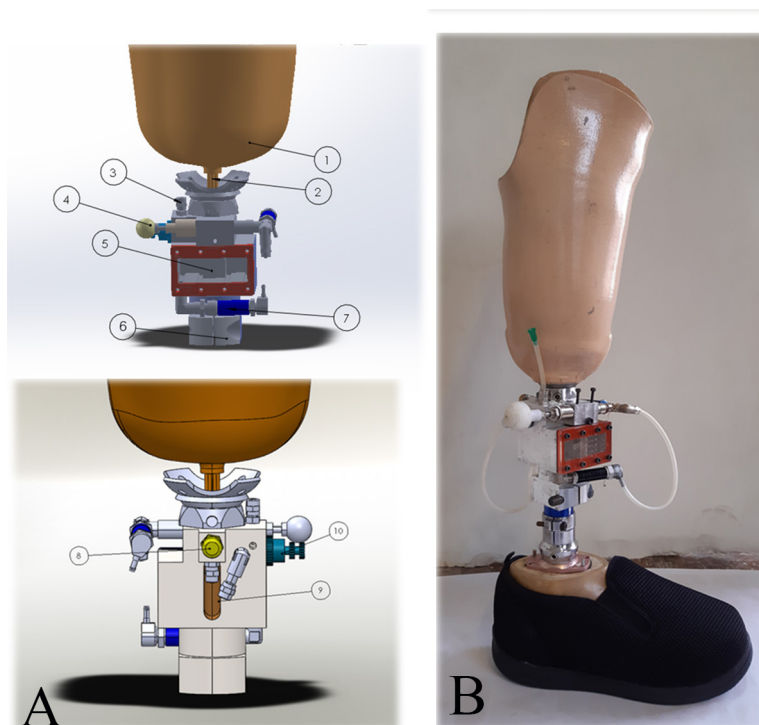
Volume adjustment system. SolidWorks design (A): expandable liner (1), connective tubes (2), water injection channel (3), pumping piston (4), water container (5), tube clamp (6), one-way valve (7), air evacuation valve (8), track for silicone tubes (9), water evacuation valve (10). Pumping system assembled between foot unit and socket (B).
